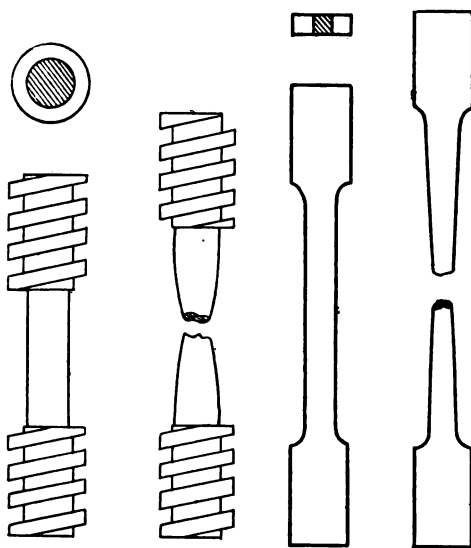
TENSIONAL TESTS, WELDED FLAT AND BARS.
